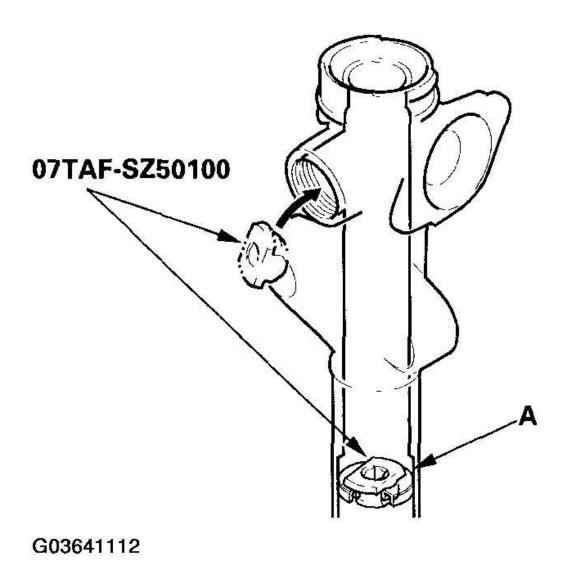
Positioning Special Tool On Cylinder End Seal Courtesy of AMERICAN HONDA MOTOR CO., INC.
